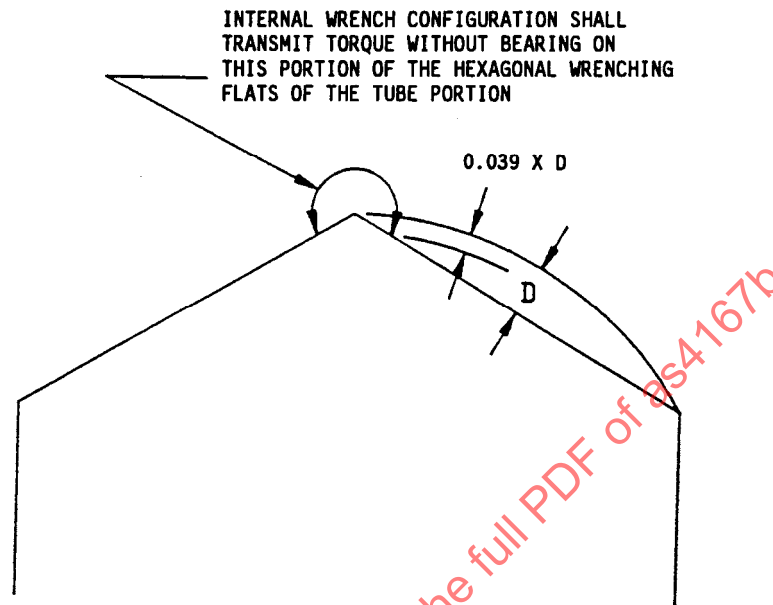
INTERNAL WRENCH ENGAGEMENT
